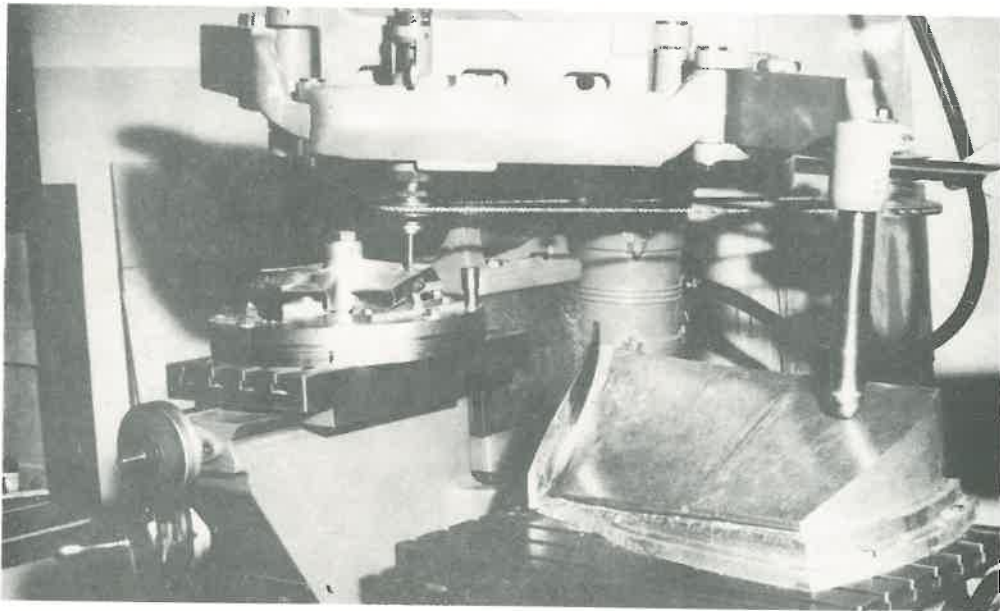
MACHINING MODEL IMPELLER IN COPYING MACHINE.
